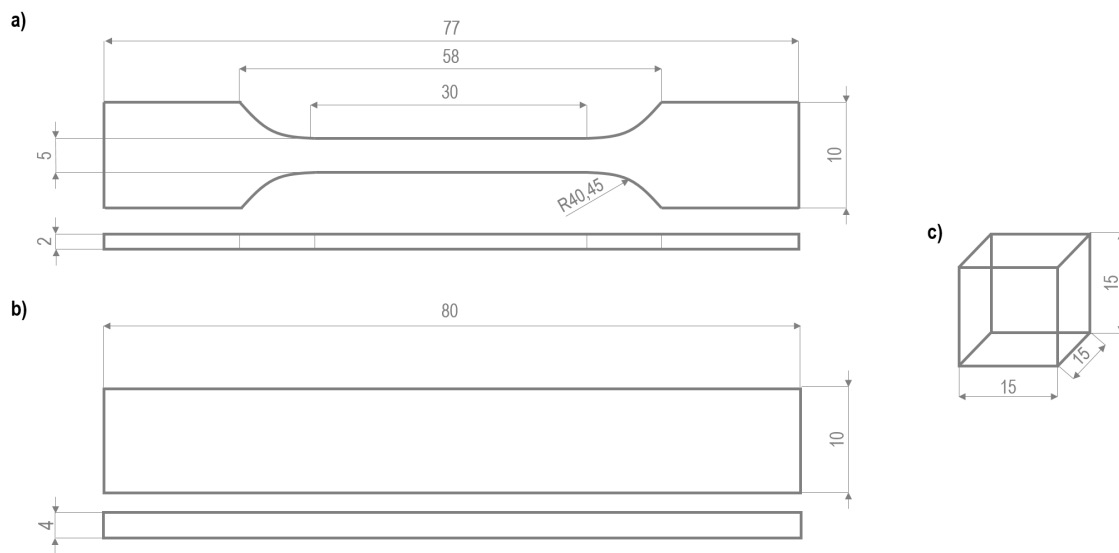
Dimentions of tested samples. a) dumbbell-shaped tensile specimen (ISO 527-2, 1BA), b) Charpy impact test specimen (ISO 179-1, unnotched), c) cubic compression test specimen
